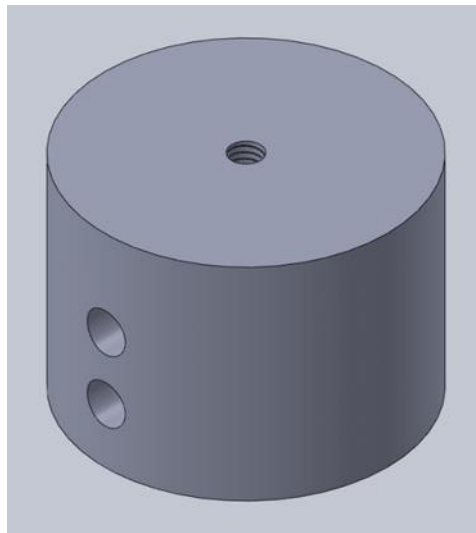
3-D drawing from Solidworks of the stainless steel cylinder. The SEM stud would screw into the threaded insert on the top as shown. The target holder's set screws would screw into the hollow placements as shown on the side.
